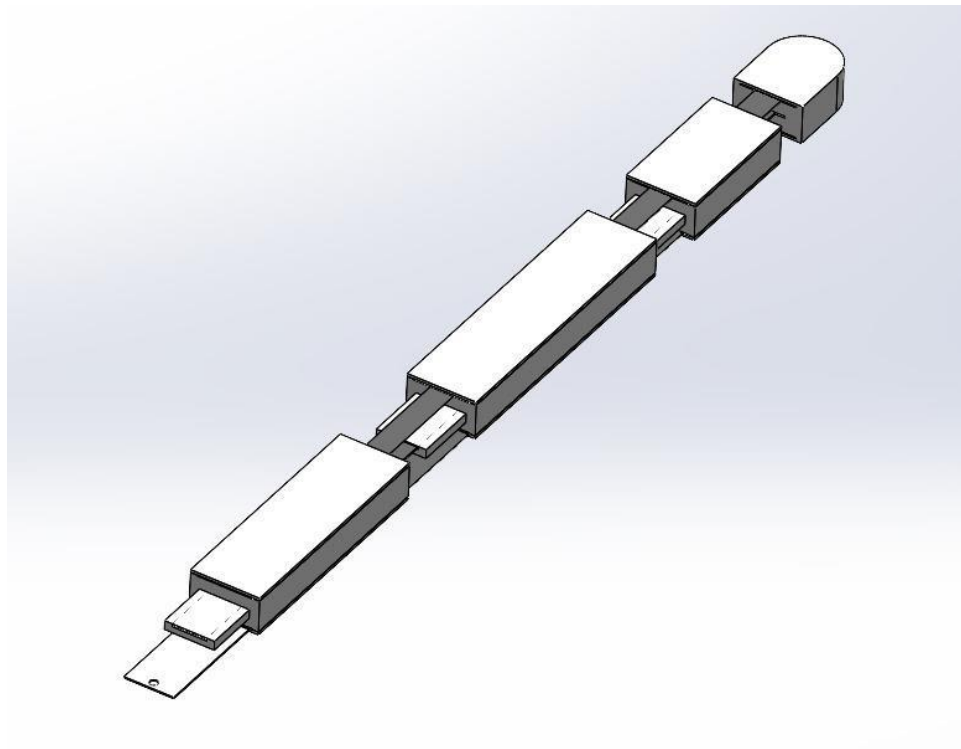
CAD Model of Independent Finger Mechanism (Isometric View)
